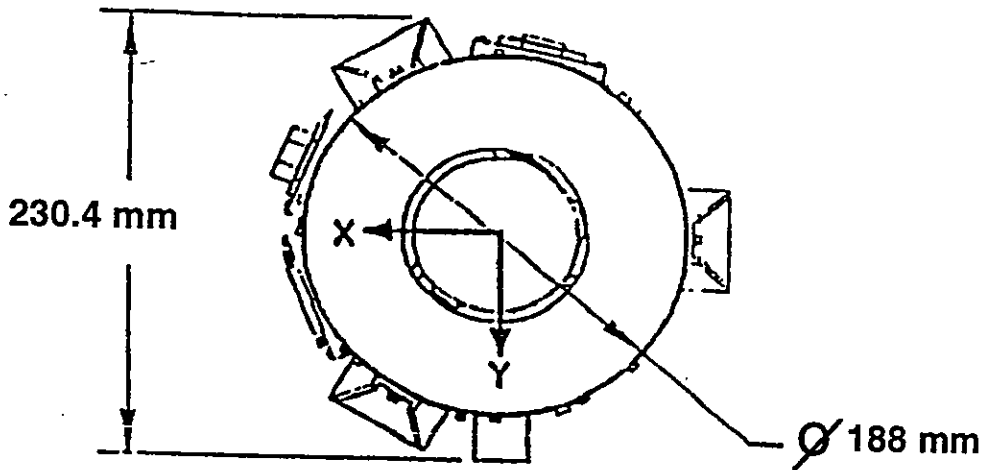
LIS SENSOR HEAD ASSEMBLY
